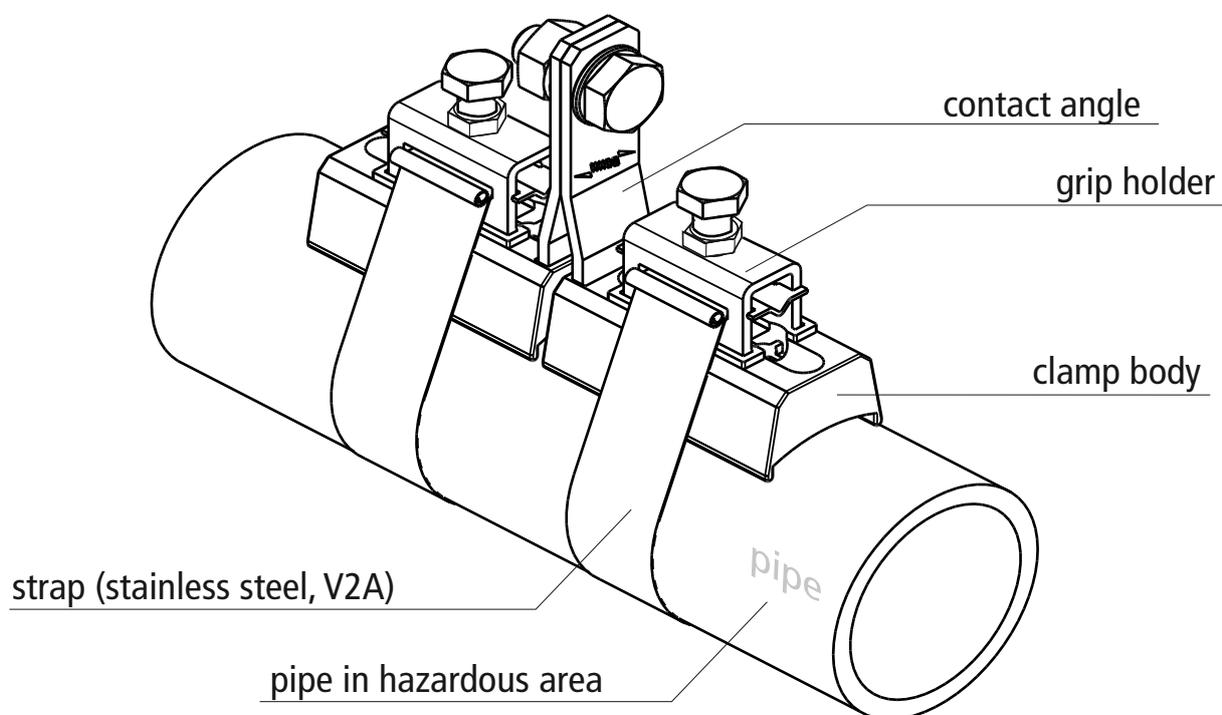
Ex-BRS 90/300/500 pipe clamp installed at a pipe (hazardous area)
